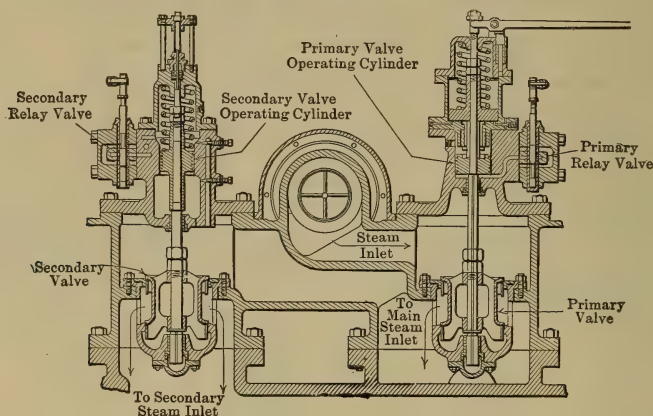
Valve Gear with Steam Relay, Westinghouse-Parsons Turbine.
